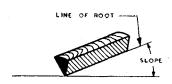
DIAGRAM TO ILLUSTRATE WELD SLOPE
